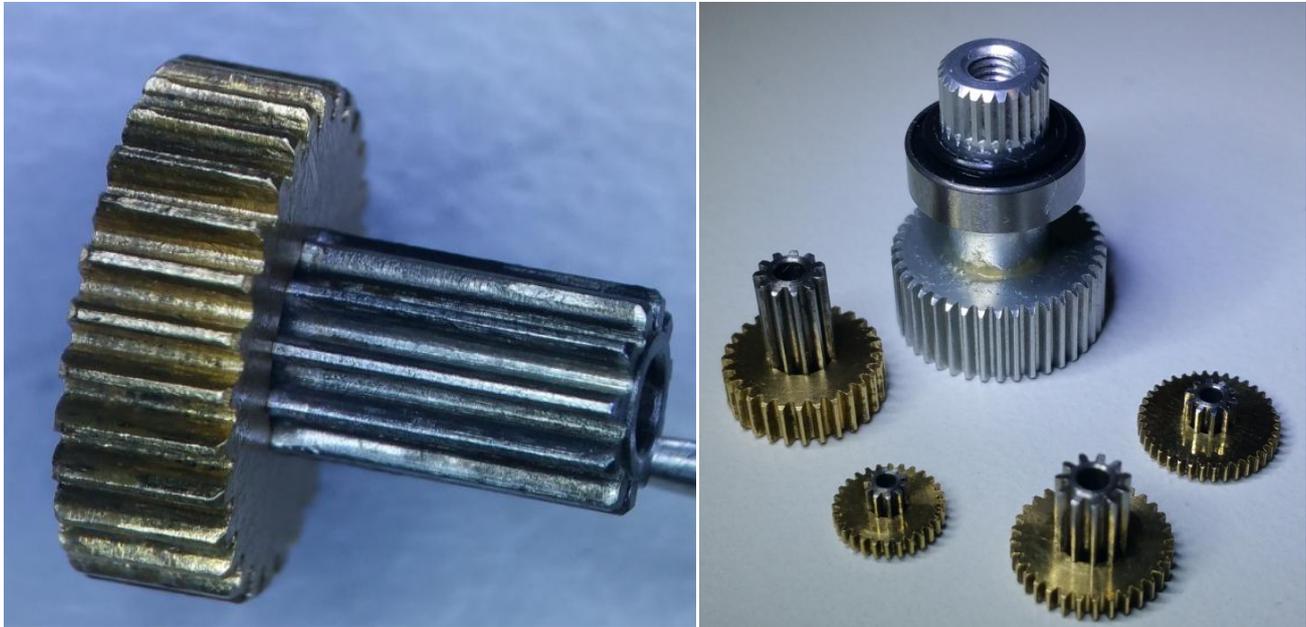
Gear showing wear on flanks (left), inspection of all gears (right)
